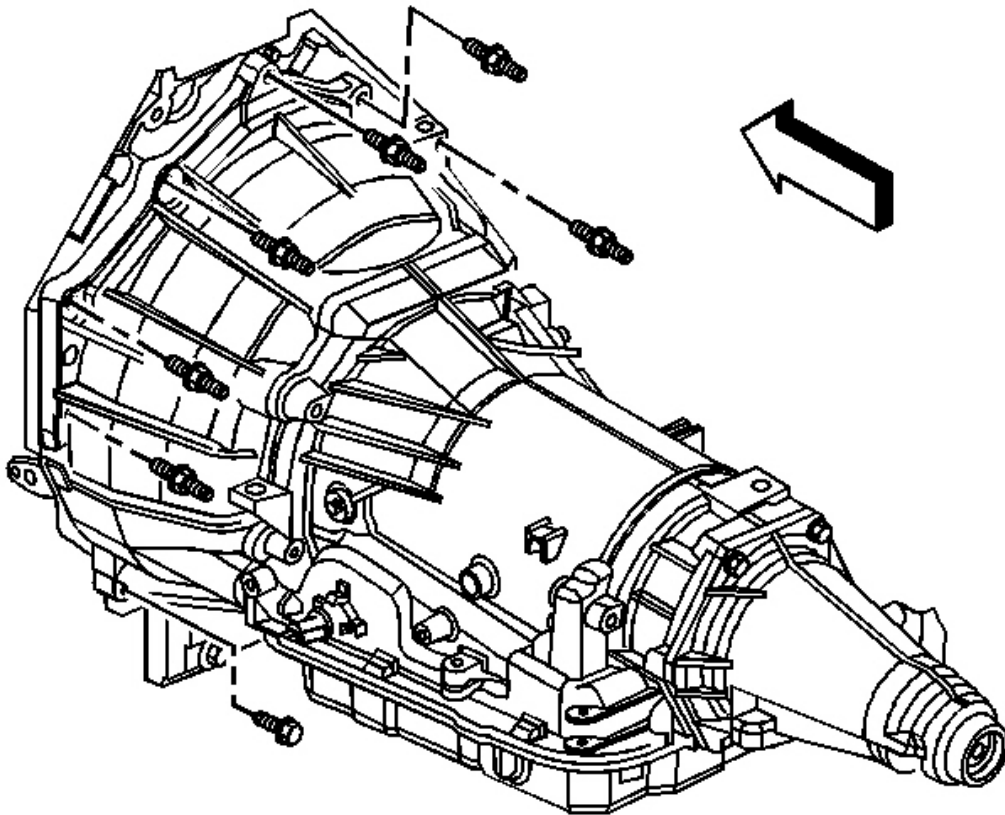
View Of Automatic Transmission Bolt/Studs (4.8L, 5.3L and 6.0L Engines)
